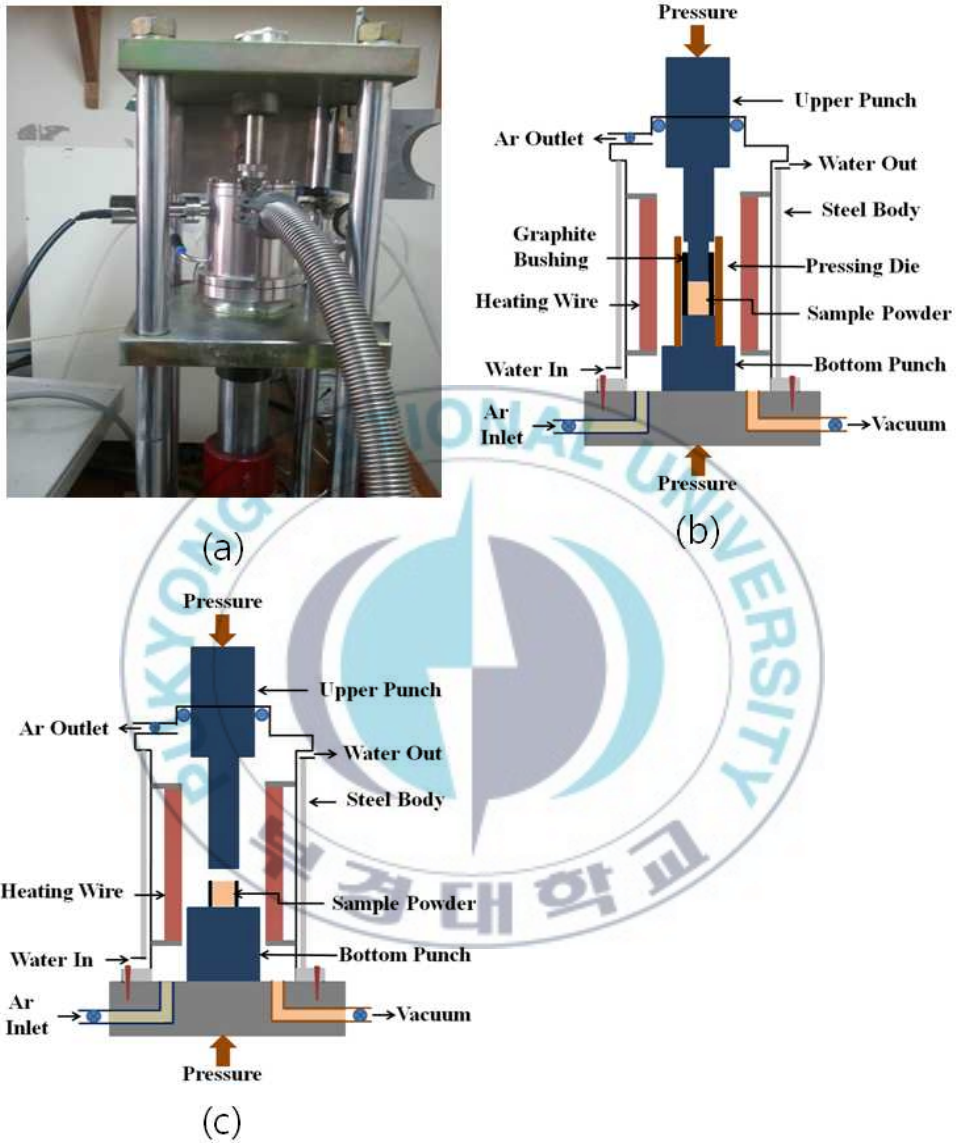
(a) Real set-up and schematic diagram of (b) closed-type, and (c) open-type die equipped with resistance heating system.
